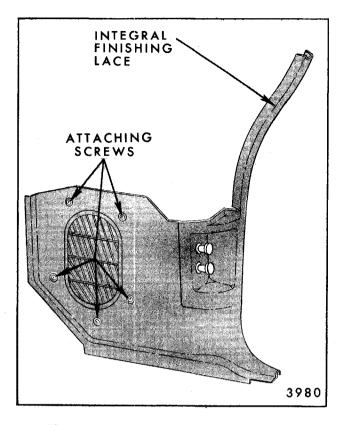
Shroud Side Finishing Panel - F Styles
